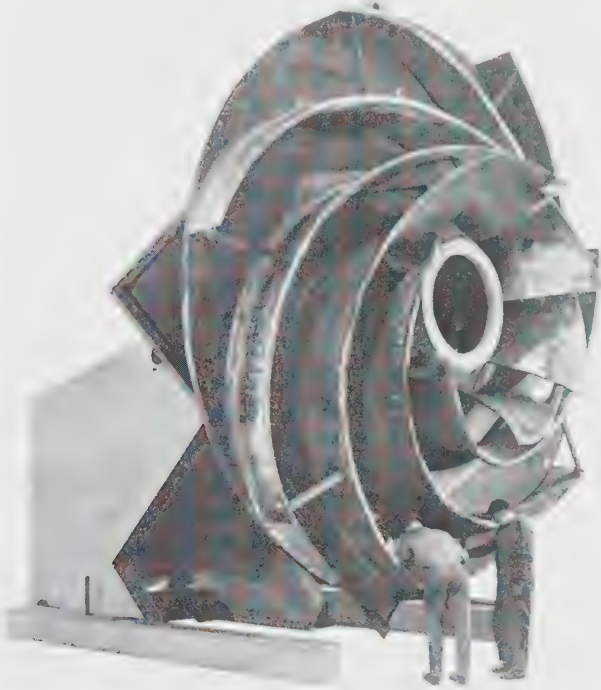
Partially completed impeller runner of Francis pump-turbine. Blades being welded in assembly mounted on welding positioner. (*Baldwin-Lima-Hamilton Corp.*)
